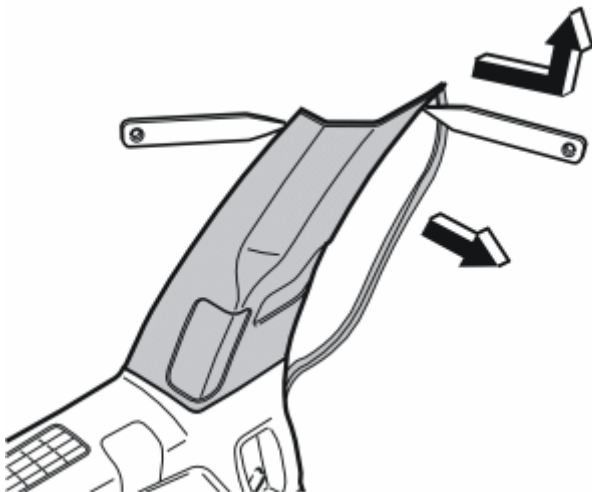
Identifying Left-Hand C-Post Panel And Plastic Weatherstrip Tools
